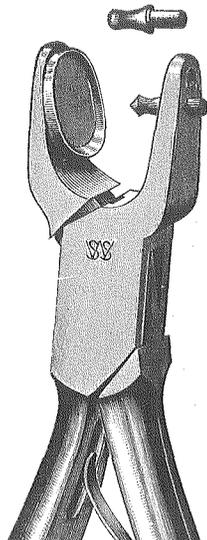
Riveting Punch, Showing Cup Beak and Two Riveting Points (Shriver)
